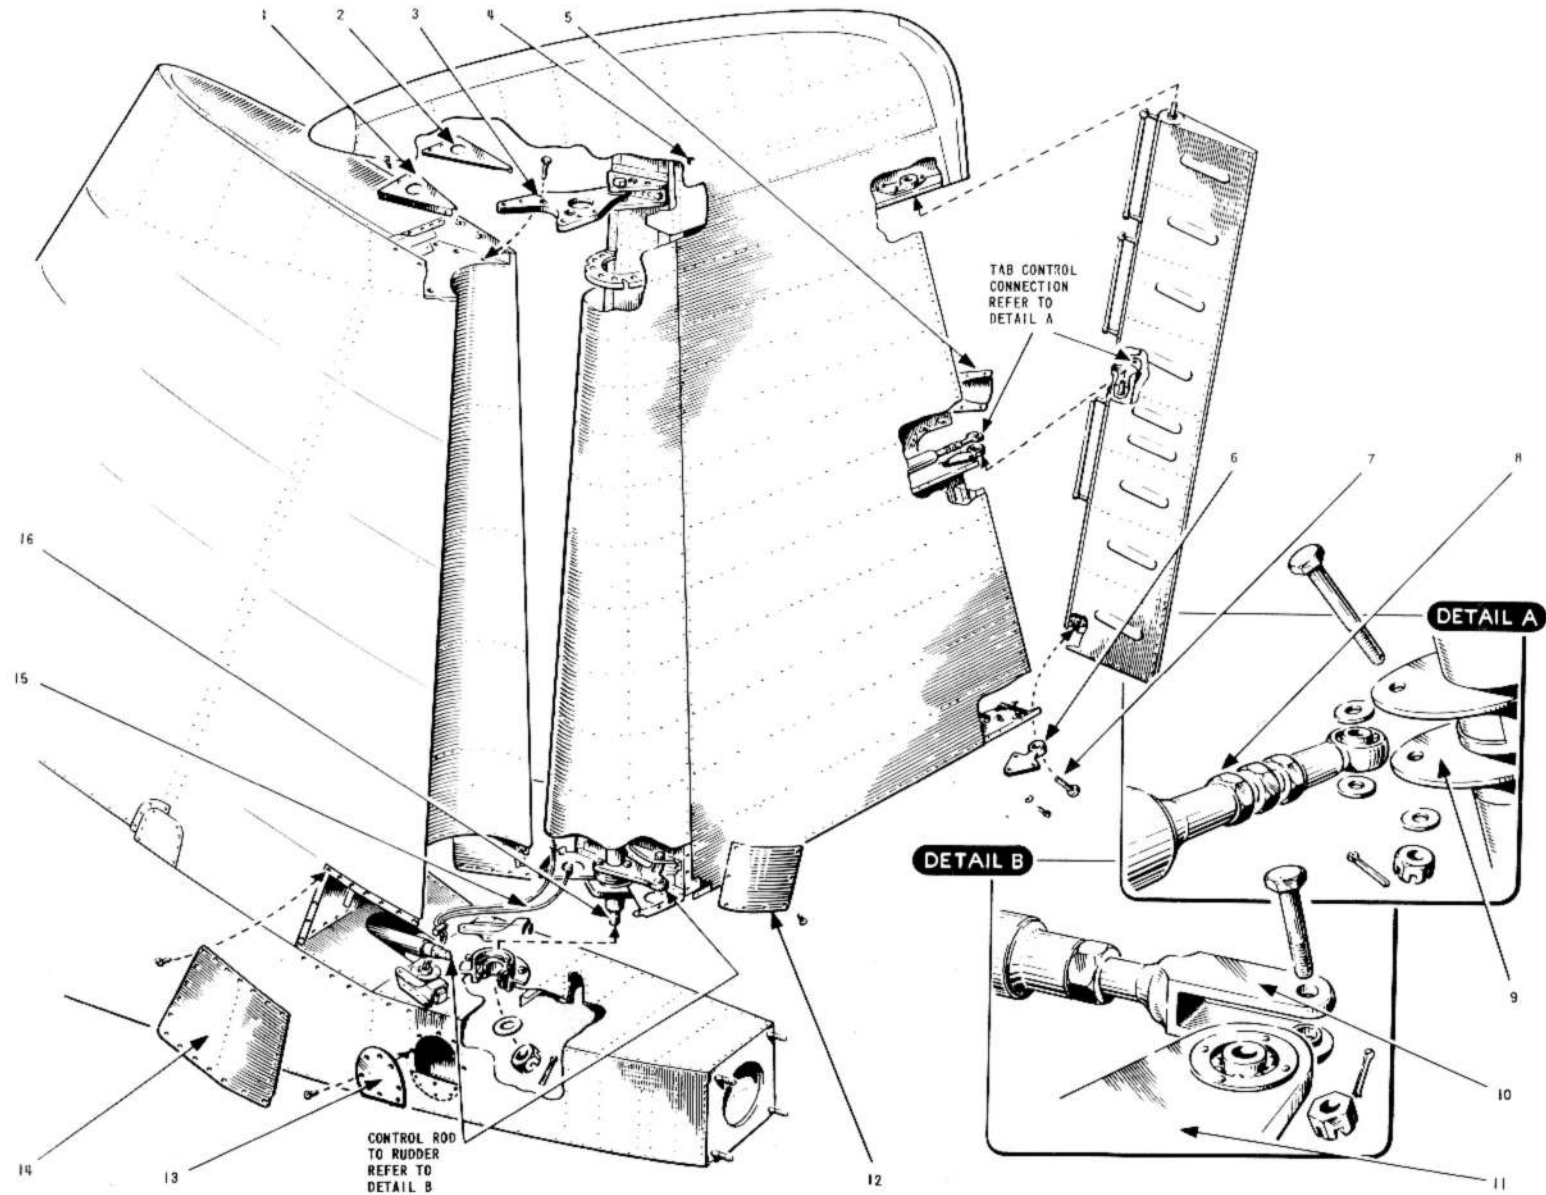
RUDDER AND RUDDER TAB REMOVAL
